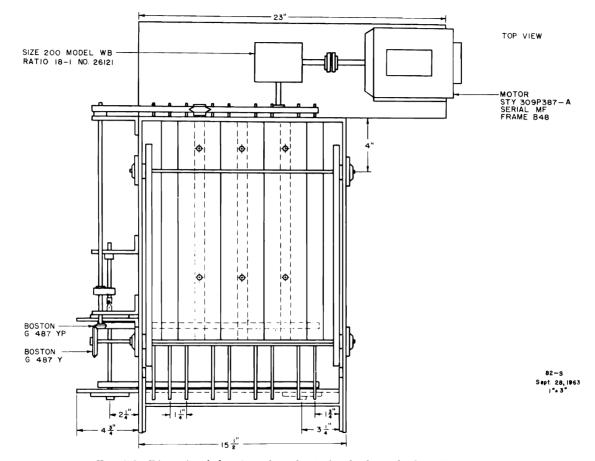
Dimensional drawing of mechanical poha berry husker. Top view.
